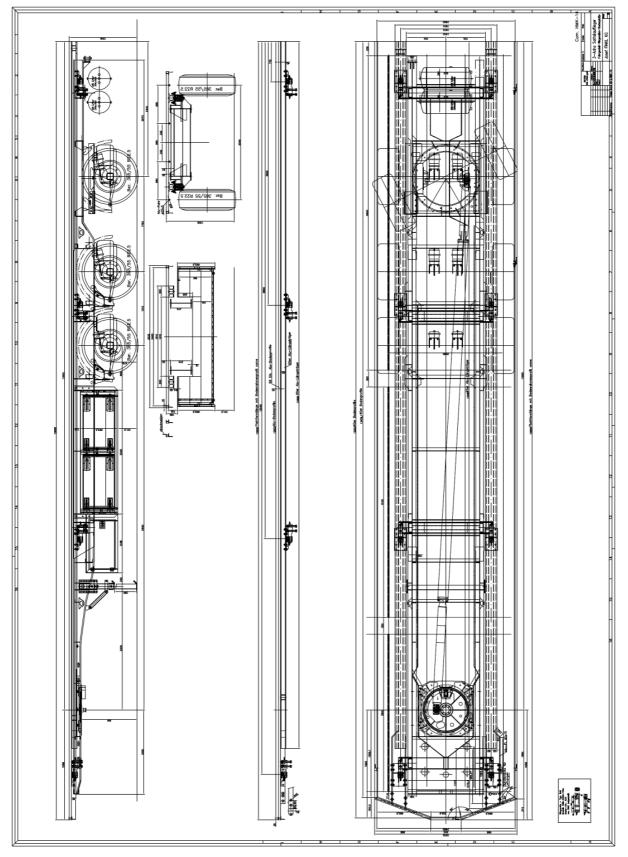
Load receptor construction for scales mounted on trucks/trailers.
